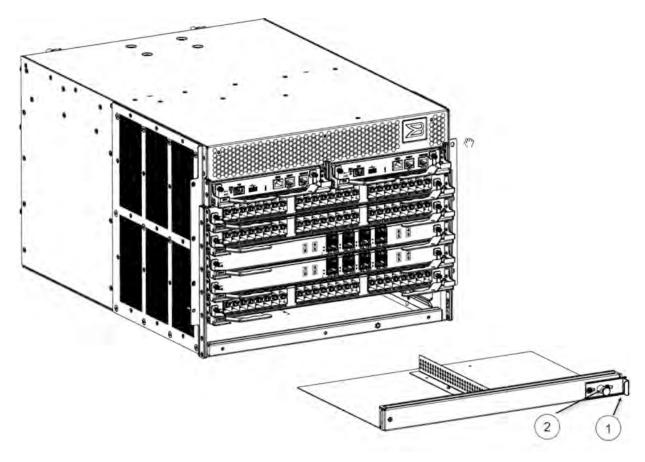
Removing and Installing the Blade Filler Panel in an SAN256B-7 Director
